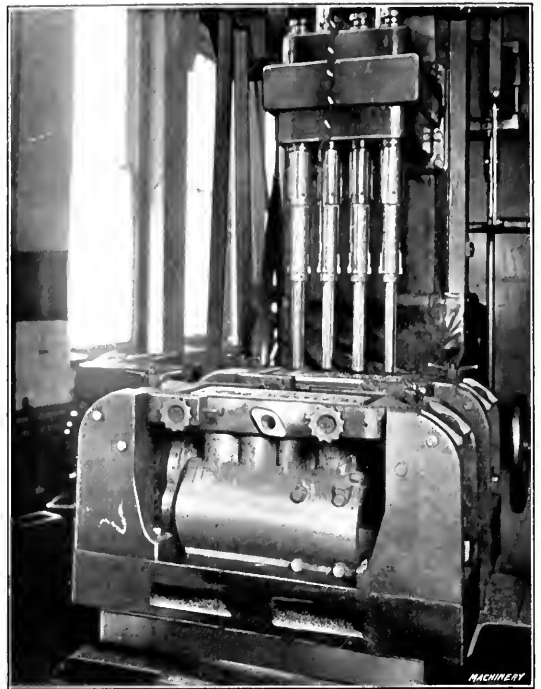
Type of Fixture used in the Plant of the Sterling Motor Co., Detroit, Mich., for holding Four Cylinder Castings while boring and reaming
